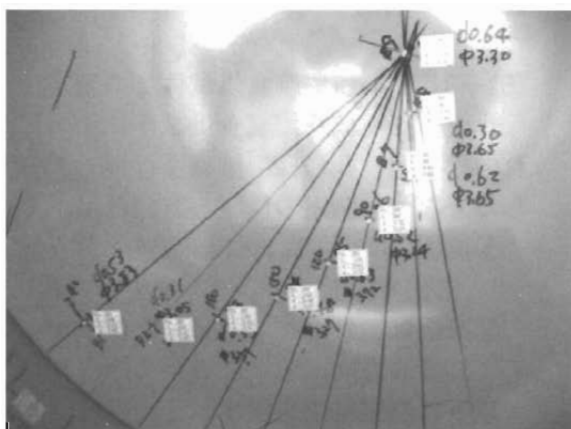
Mock-corroded Holes on Real Drum Test Piece (Bottom Plate)
